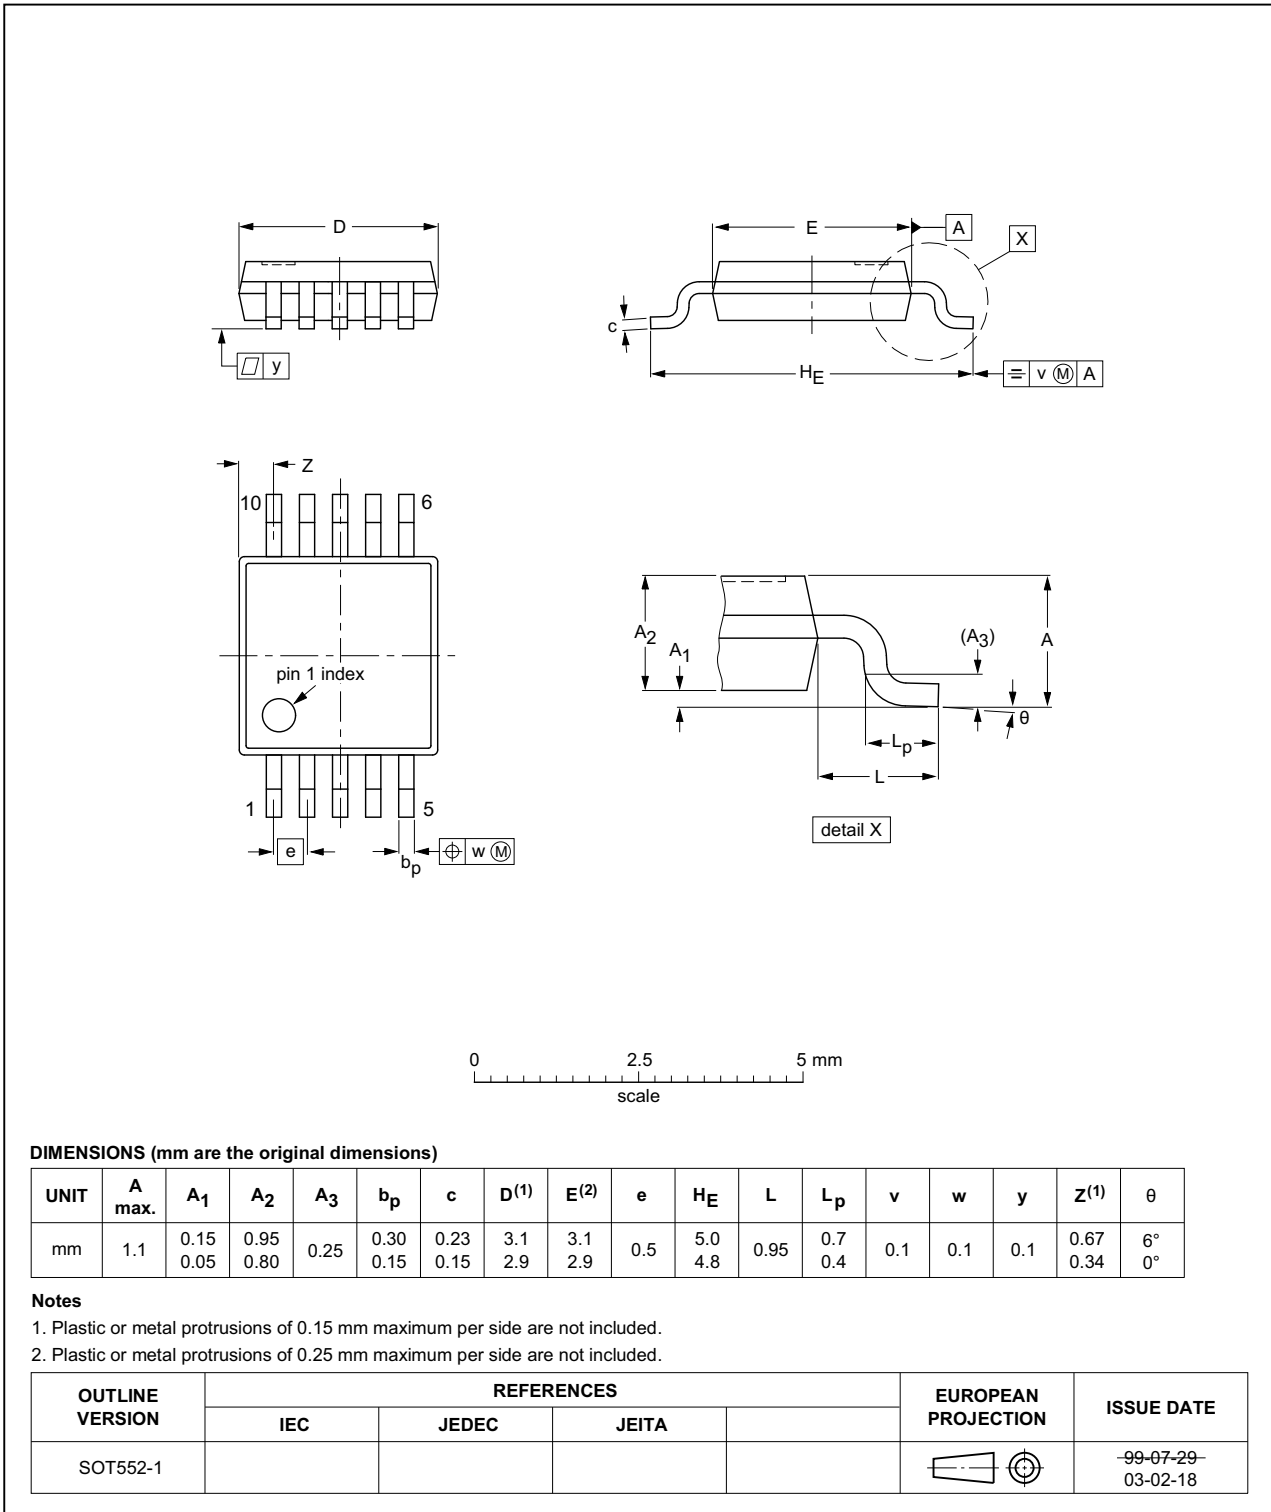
Package outline SOT552-1 (TSSOP10), PCF85363ATT1
